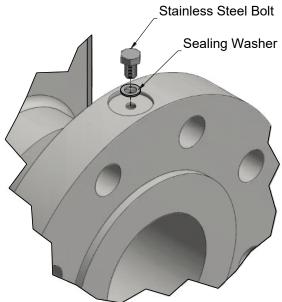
Stainless steel bolt and washer in tapped hole of meter body end flange
